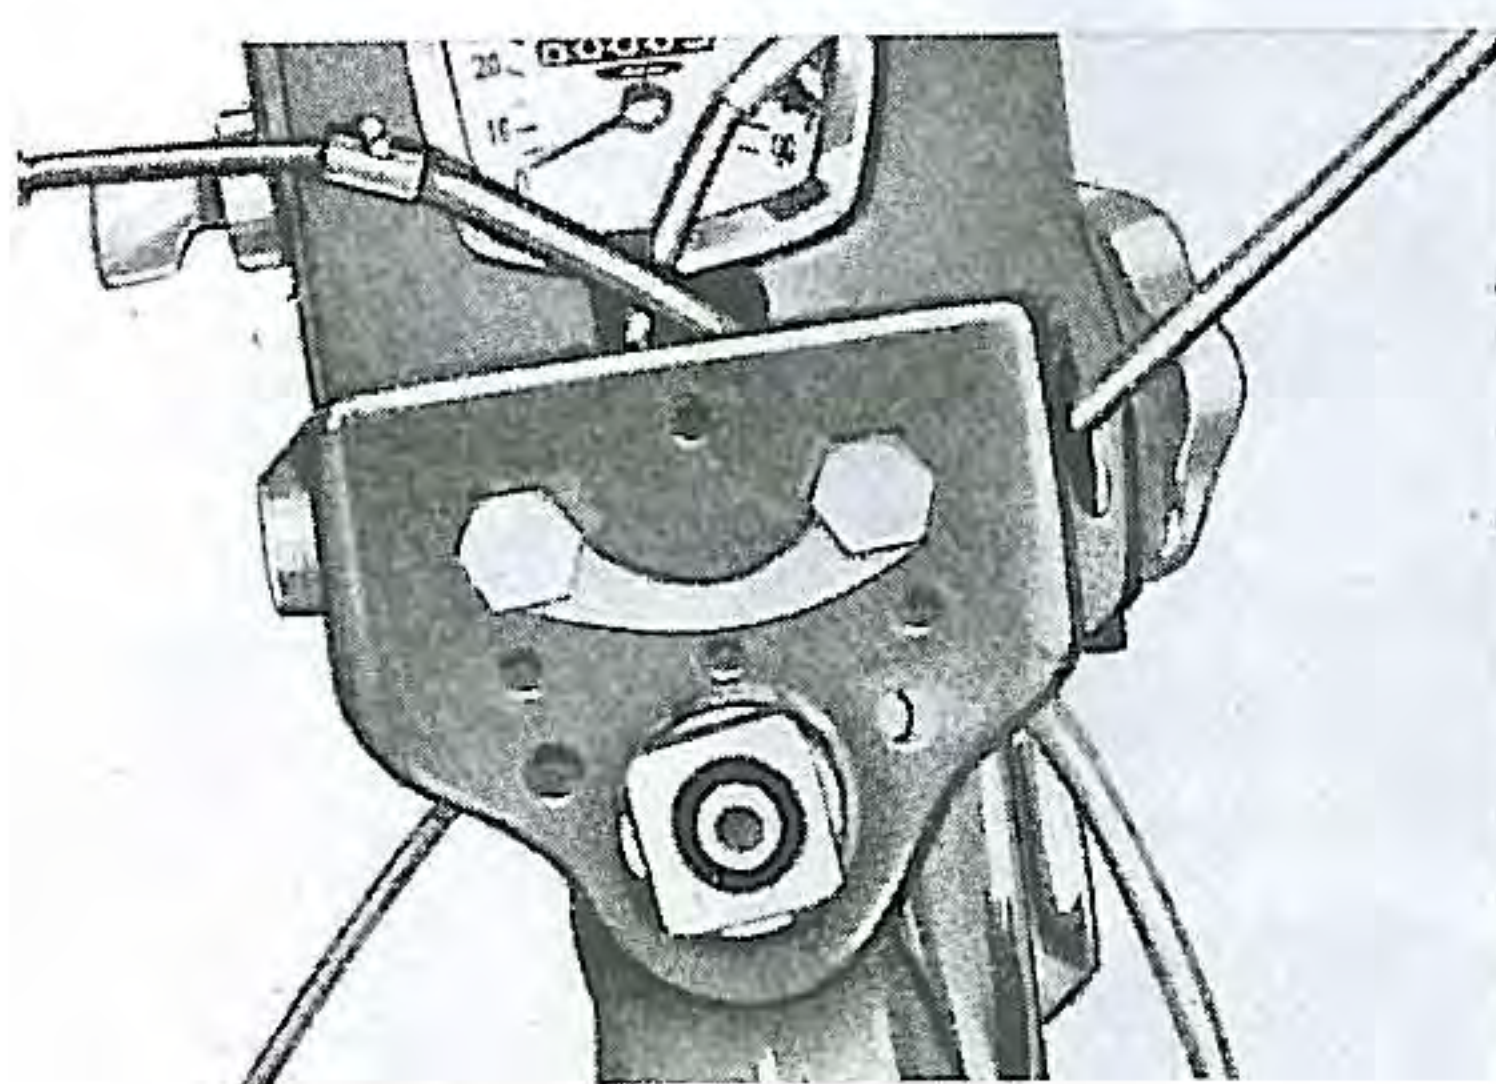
Steering stem nut and top bridge plate bolts (CB92)
